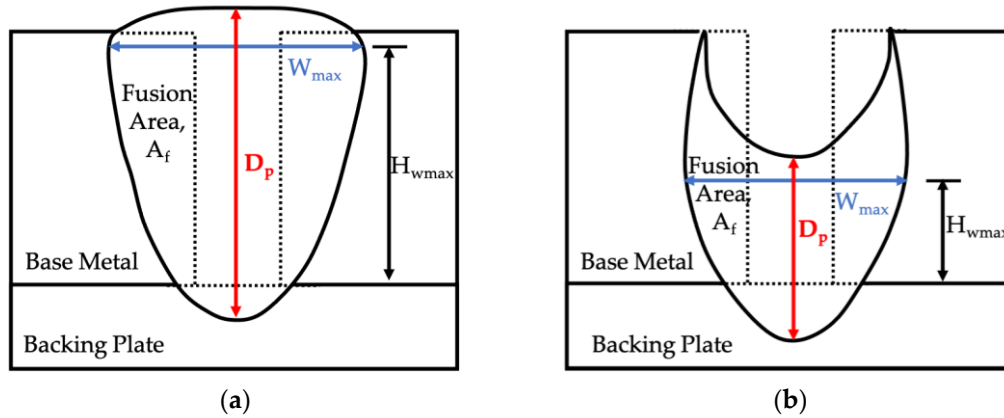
Measured parameters on the obtained welded cross-section: (a) weld geometry parameters for the underfill condition and (b) weld geometry parameters for the full-penetration condition.
